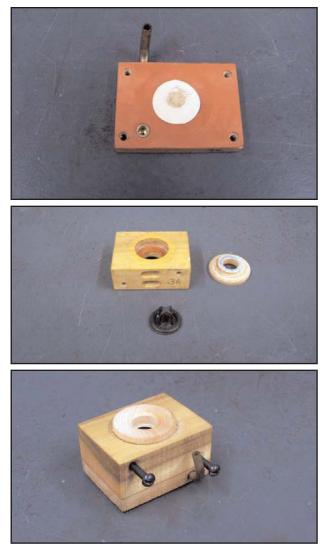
(top). The bottom section of the block valve with the pouch and bleed.
